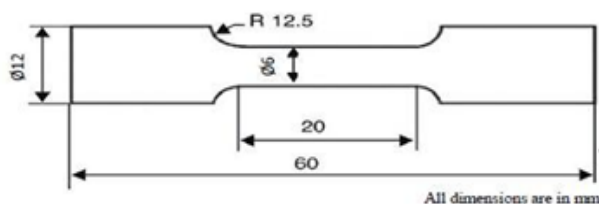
Tensile Test specimen dimensions according to ASTM standards
